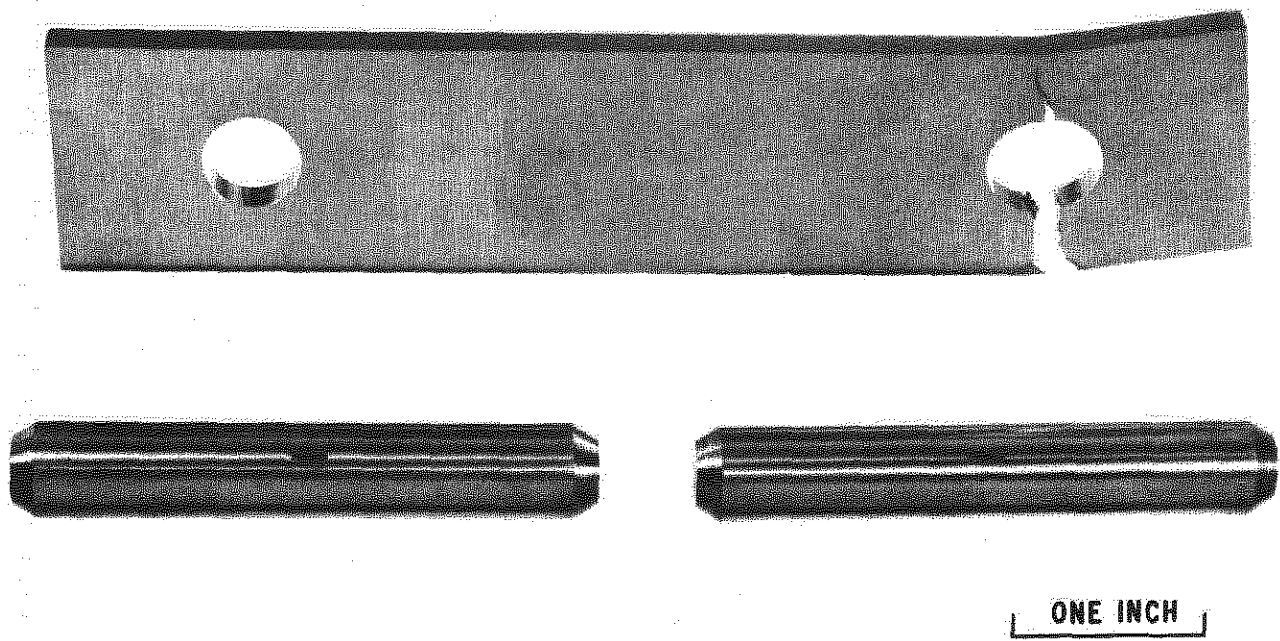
Typical failed specimen showing fatigue failure originating from area of fretting
